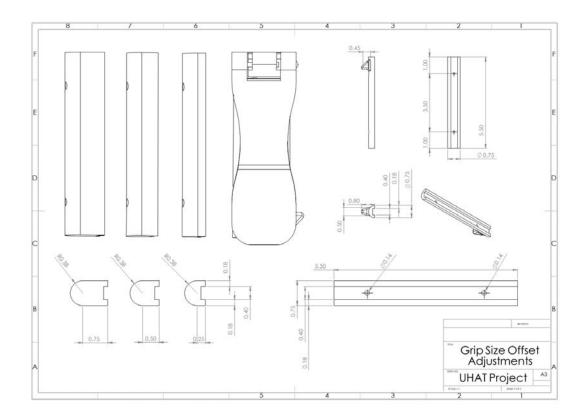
Annotated drawing of the grip size offset panels, with measurements.
